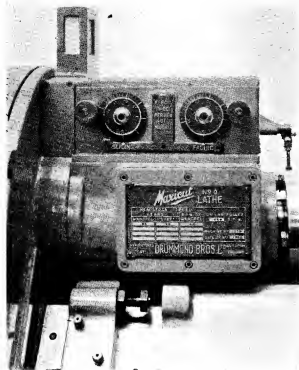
Headstock housing of No. 0 "Maxicut" lathe, showing control dials of pumps operating sliding and cross feeds.
